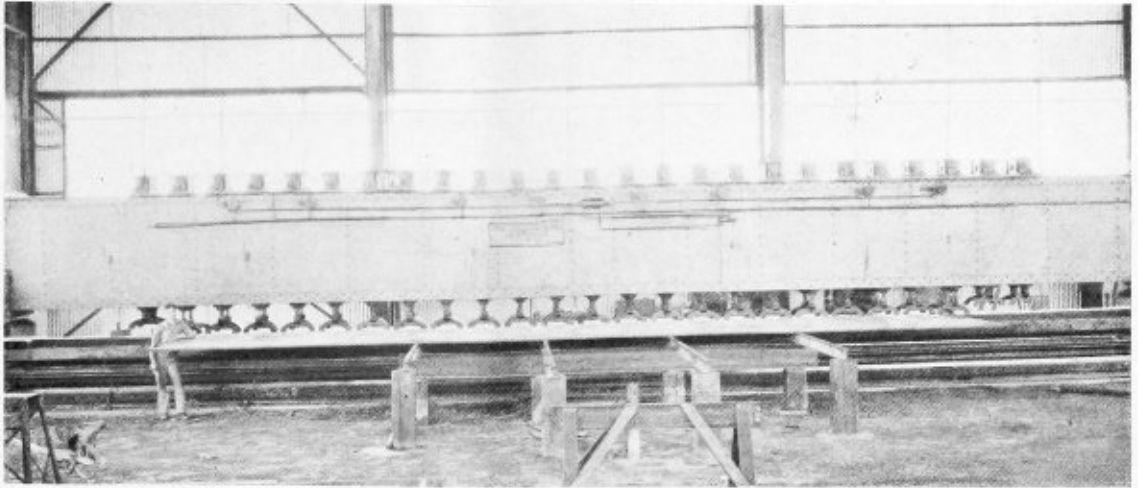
Interior shop view showing work in progress; automatic welding machines at left, and indexing and drilling mechanism in foreground
